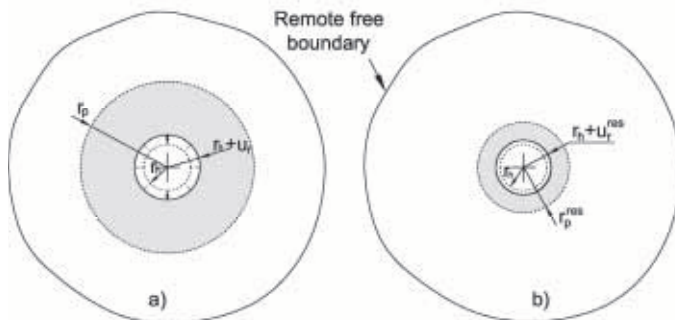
Cold expansion process: a) after imposing hole edge displacement (or pressure); b) After removing the imposed hole edge displacement.
